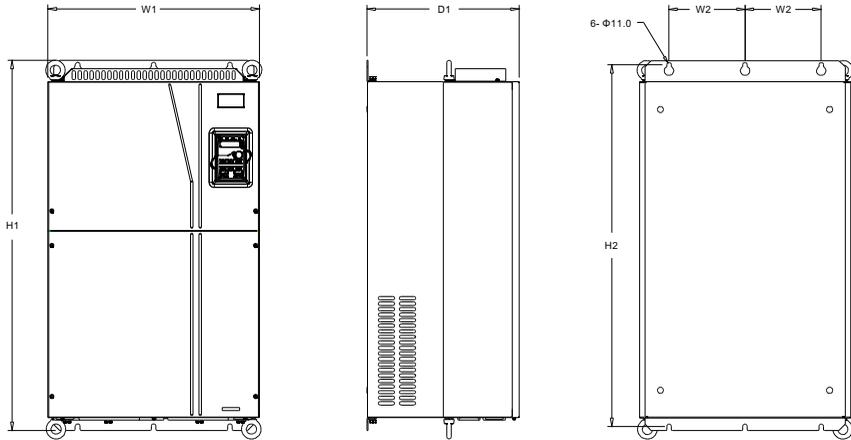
Wall-mounting diagram of inverters of 400 V, 132 to 200 kW
